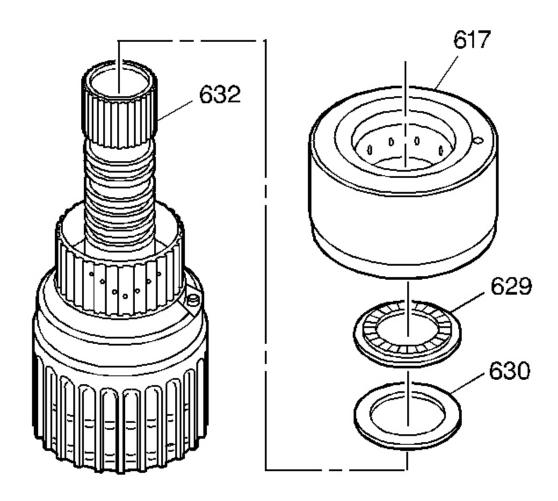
Identifying Second Clutch Housing & Input Clutch Components Courtesy of GENERAL MOTORS CORP.
